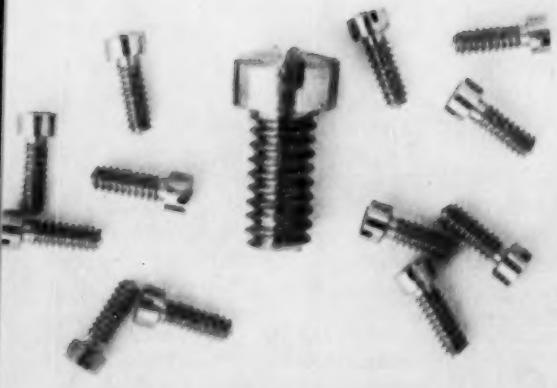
Miniature screws in relation to type size of commercial typewriter. On these special watch screws, major thread diameters range from 0.30 to 0.90 mm (0.118 to 0.0354 in.).
